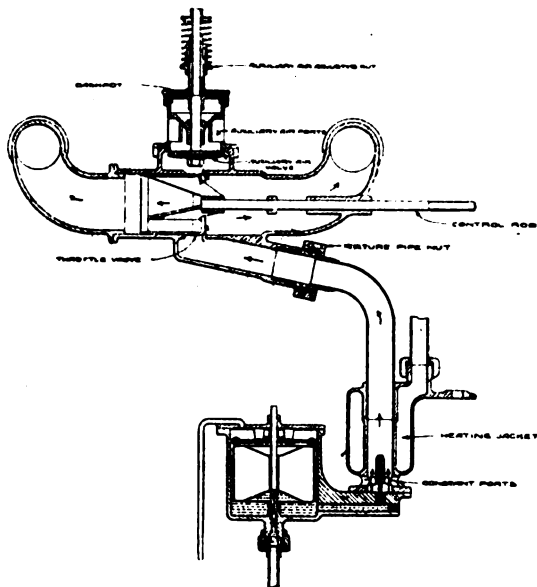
Sectional View of Carburettor on Siddeley 14-20-h.p. Car.
